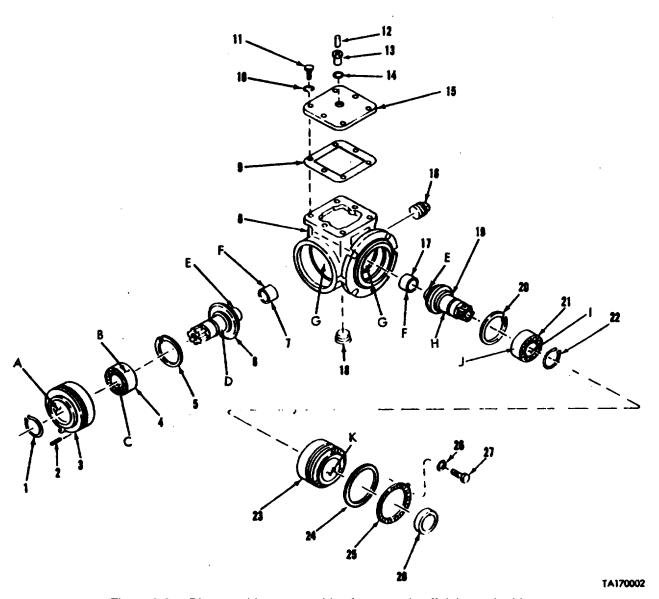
Disassembly or assembly of power takeoff right-angle drive.
